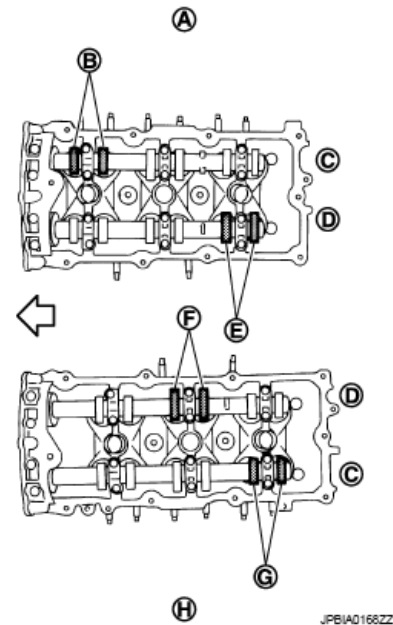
Identifying Intake And Exhaust Valve Clearances
